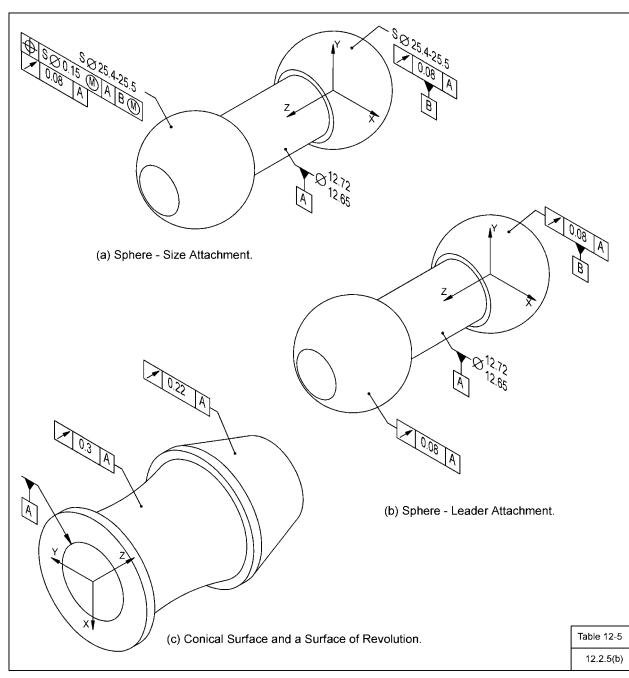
Runout – Spherical, Conical, and Revolved Surfaces
